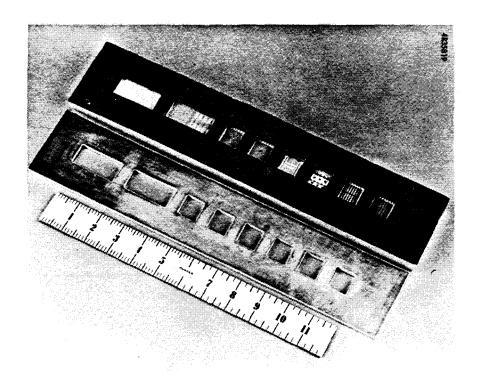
Hybrid masking tooling, partially assembled with foam rubber matts installed both under and over typical parts.
